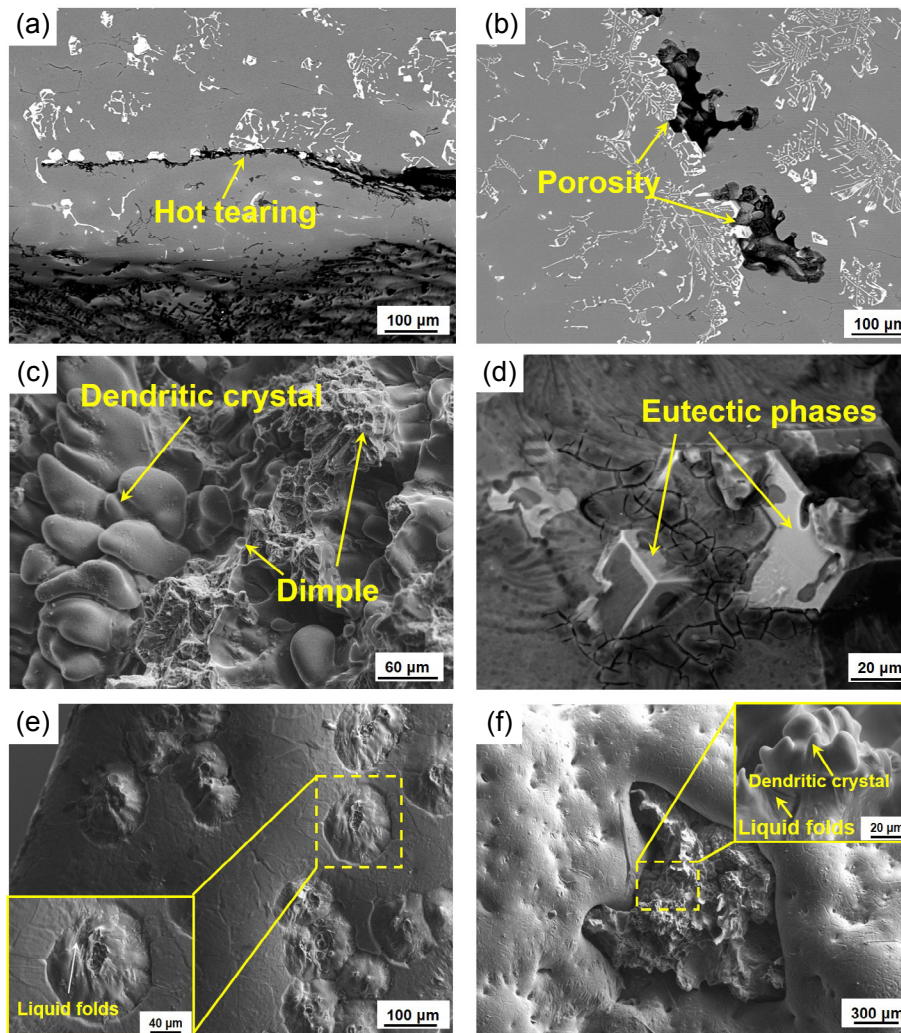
Hot tearing fracture morphologies in hot tearing zone of 2D12 aluminum alloy hollow billet prepared by TZCC at a casting speed of $2 \text{ mm} \cdot \text{min}^{-1}$: (a)–(d) vertical section; (e) and (f) cross section
